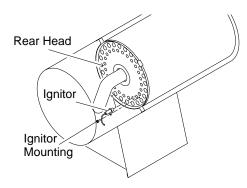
Removing Ignitor Mounting Screw and Ignitor
